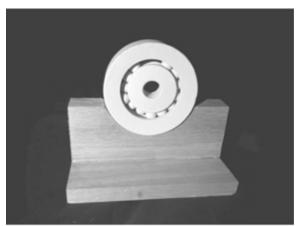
3D printed ball bearing in exhibit frame. (Cody Drago)
